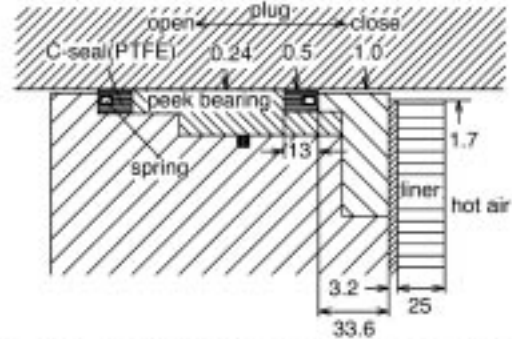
Details of sealing part in the hot valve having the hot air leakage
